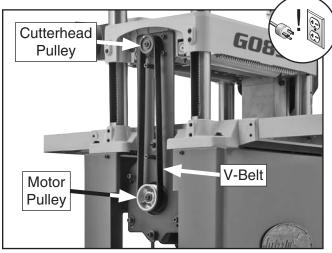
Belt cover and side panel removed to expose V-belt and pulleys.
